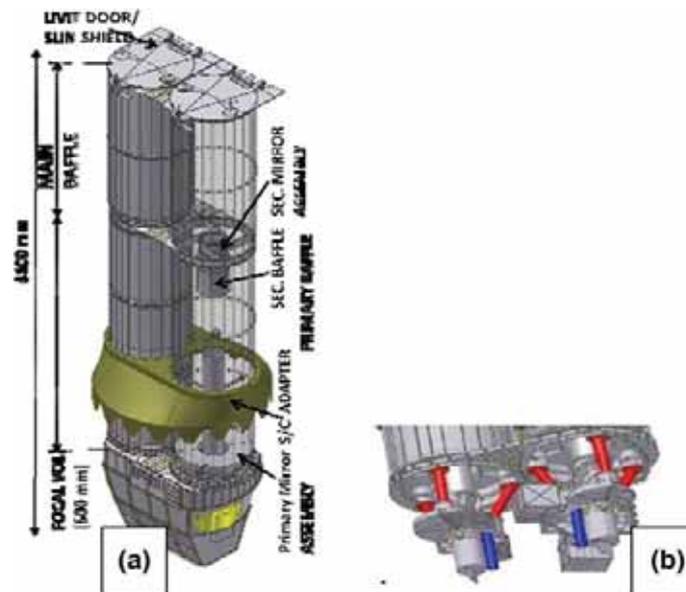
(a) UVIT payload assembly with TI mounting adaptor and (b) back focal plane assembly.
